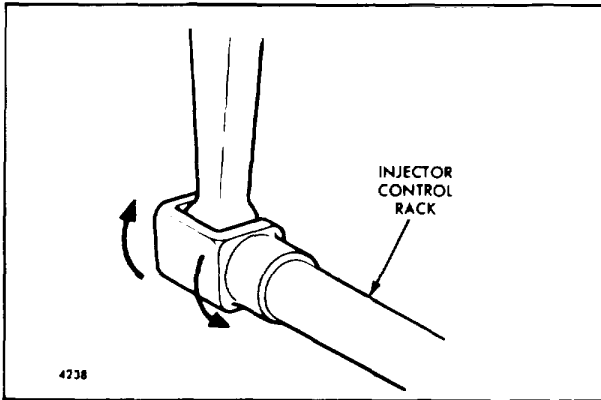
J - Checking Rotating Movement of Injector Control Rack
